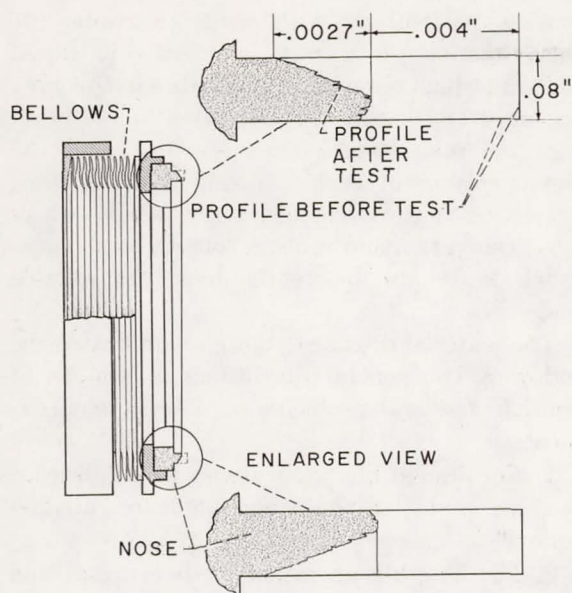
Nose-piece wear due to seal vibration.
